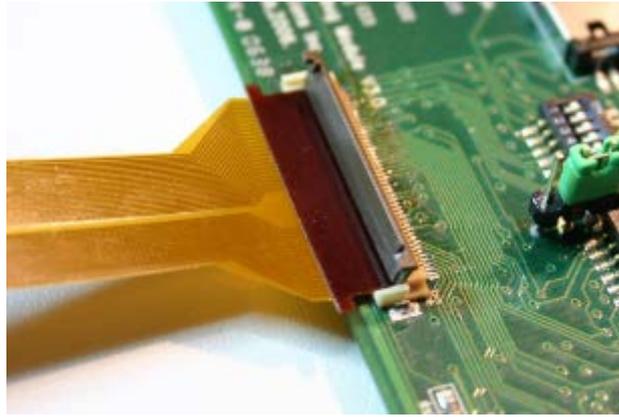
3D Assembly using Board to Board Connectors<sup>1</sup>
